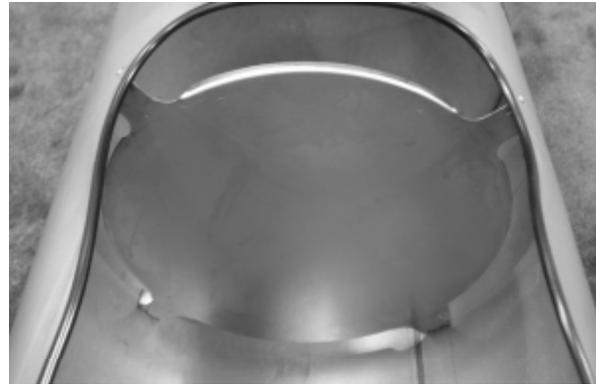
Overflame Baffle Located in Top of Heat Exchanger Assembly (cut-away view).
